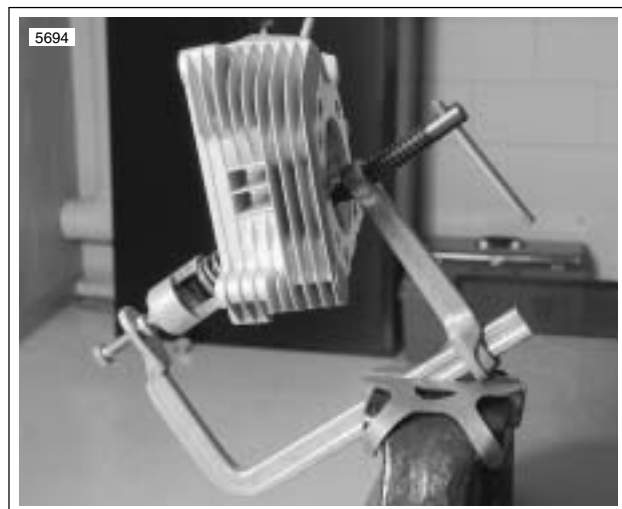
Valve Spring Compressor (Part No. HD-34736B)
